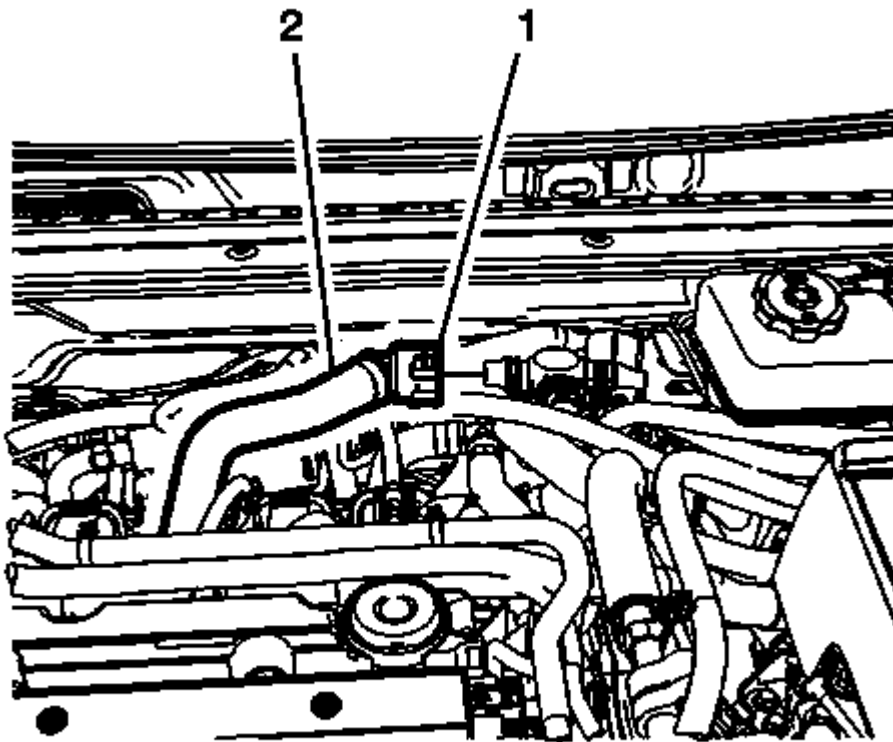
Heater Water Shutoff Valve Inlet Hose Quick Connect Fitting
